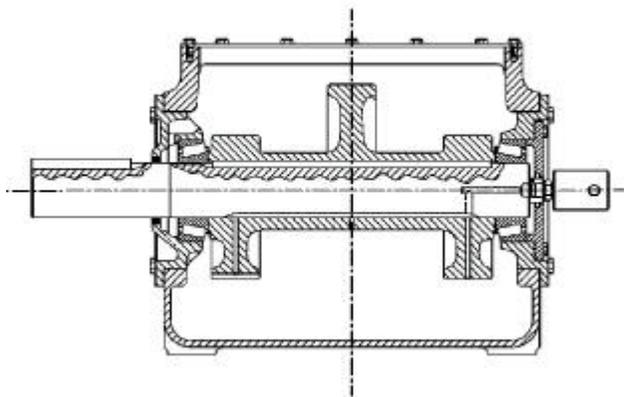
SECTIONAL VIEW SHOWING ECCENTRIC
